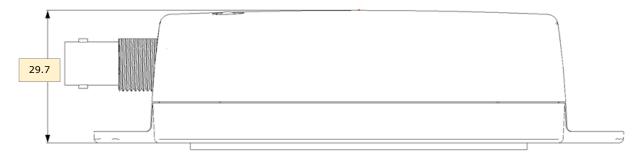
Modbus EC Sensor Adapter Dimension - Side View
